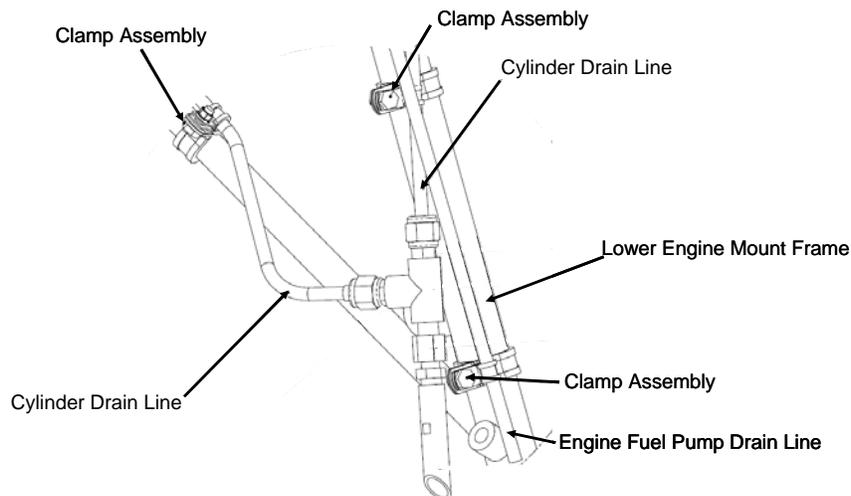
Fuel Drain Line Clamp Assembly Installation
